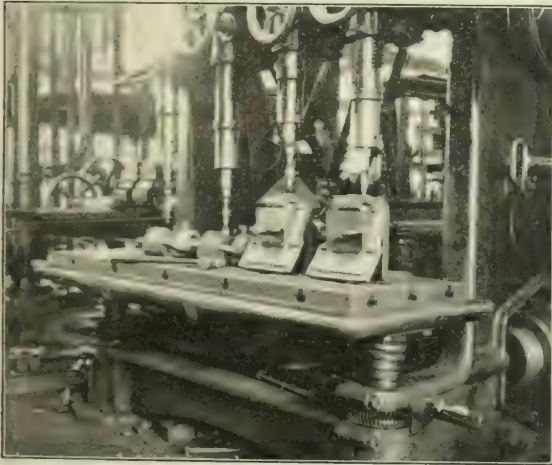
New Type Contact Shoe and Knuckle Jigs as Used on Drill Press.
